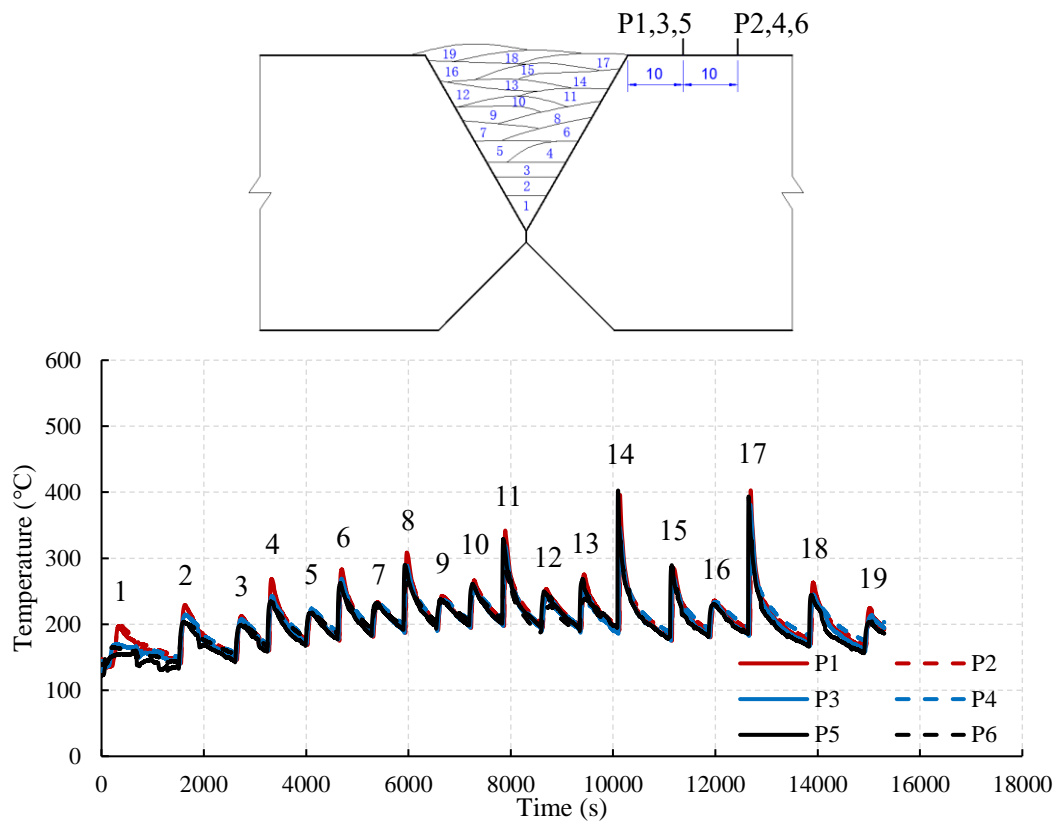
Arrangement of thermocouples along the groove of the welded section
